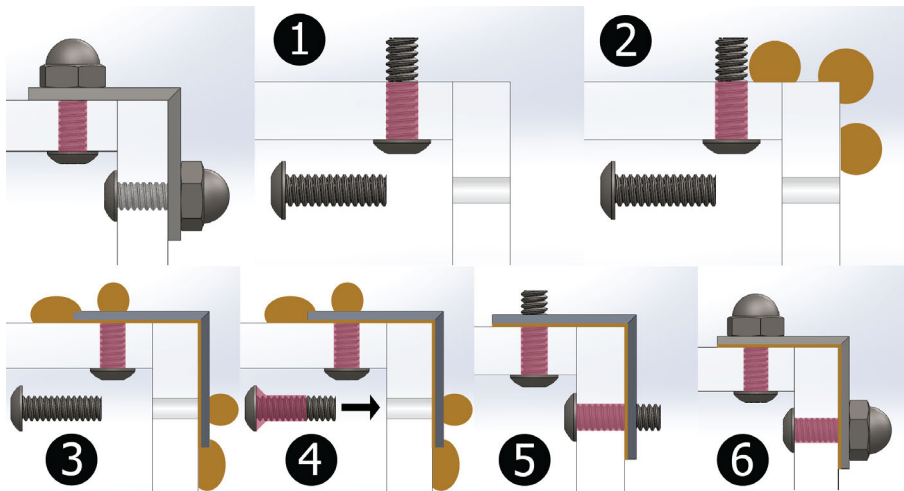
Instructions for applying caulk and epoxy to edges. The top left panel shows the screws before the main assembly, and the others show the steps of the main assembly. Caulk is shown in orange and epoxy is shown in translucent red.
